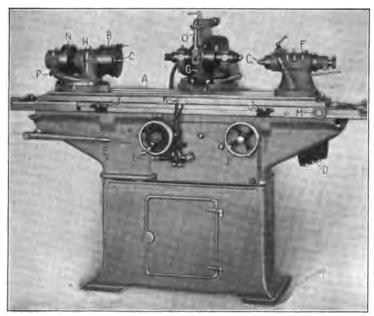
Brown & Sharpe Universal Cylindrical Grinding Machine
